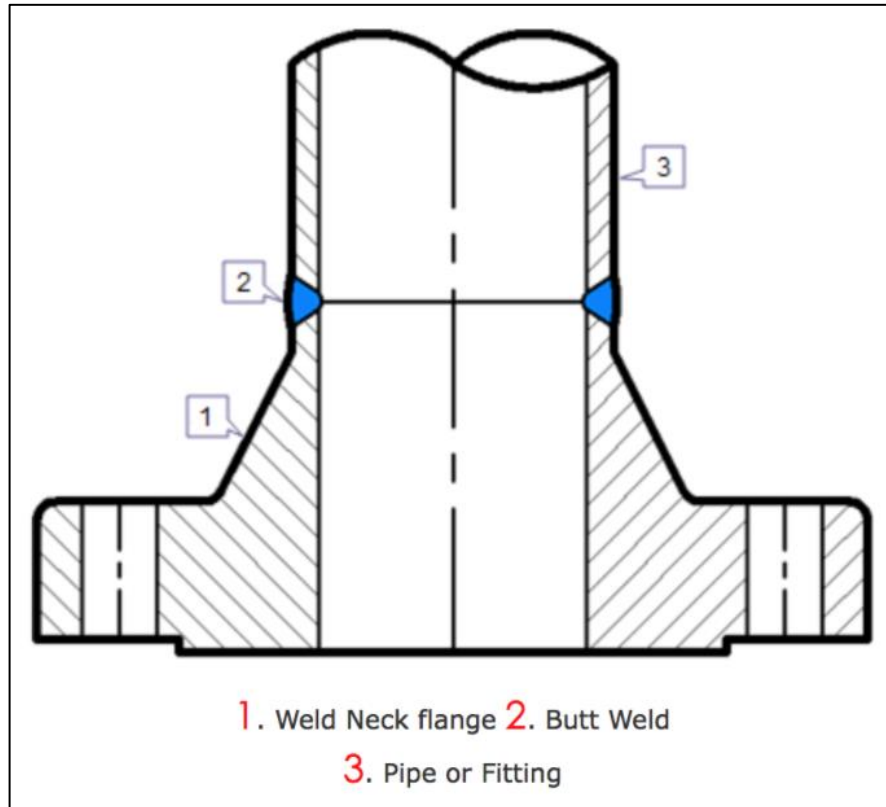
Section View of Weld Neck Flange (Image Reference: theprocesspiping.com)
